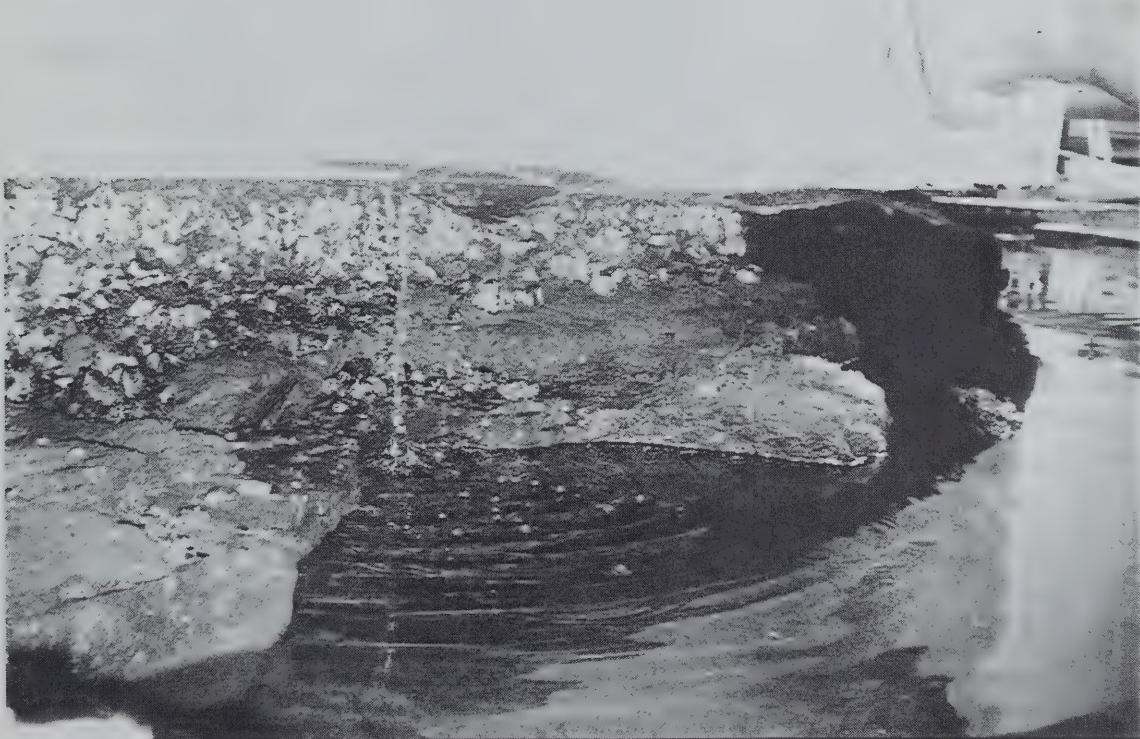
The corroded weld joining the side wall to the base failed causing a loss of contents.
